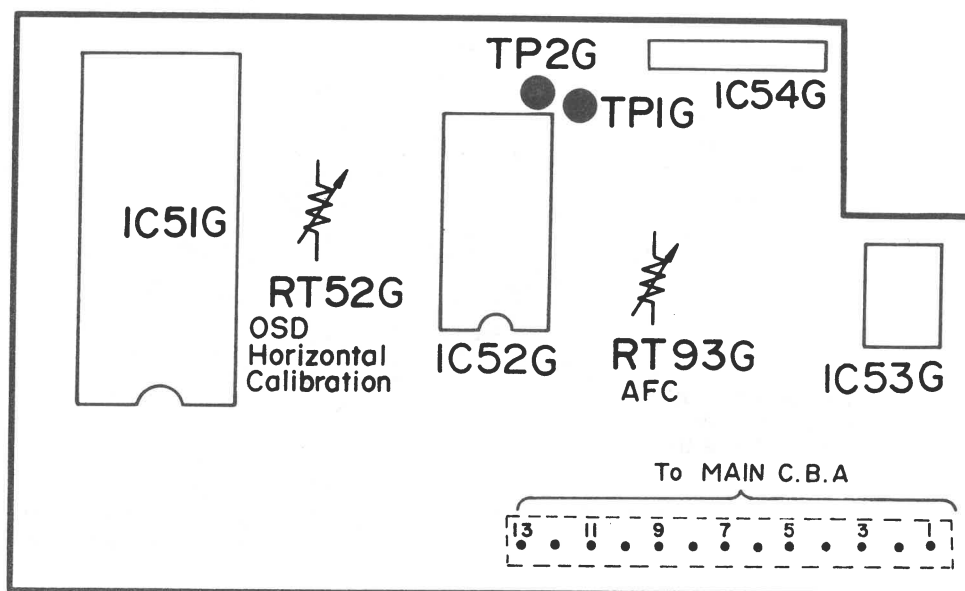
Character Generator Test Point/Control Location (Component Side)
